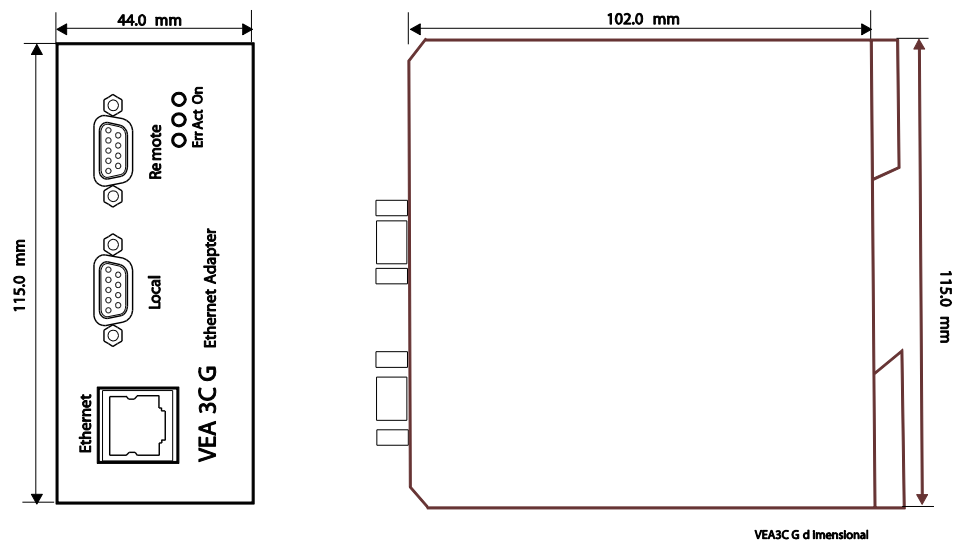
Ethernet adapter VEA 3CG dimensions
